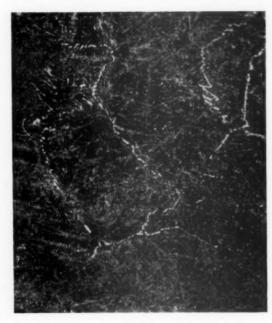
Surface cracks on a 4½% Nickel-Chromium C.H. Steel Spindle caused by excessive carburisation. A lower carburising temperature would result in a less brittle case.
